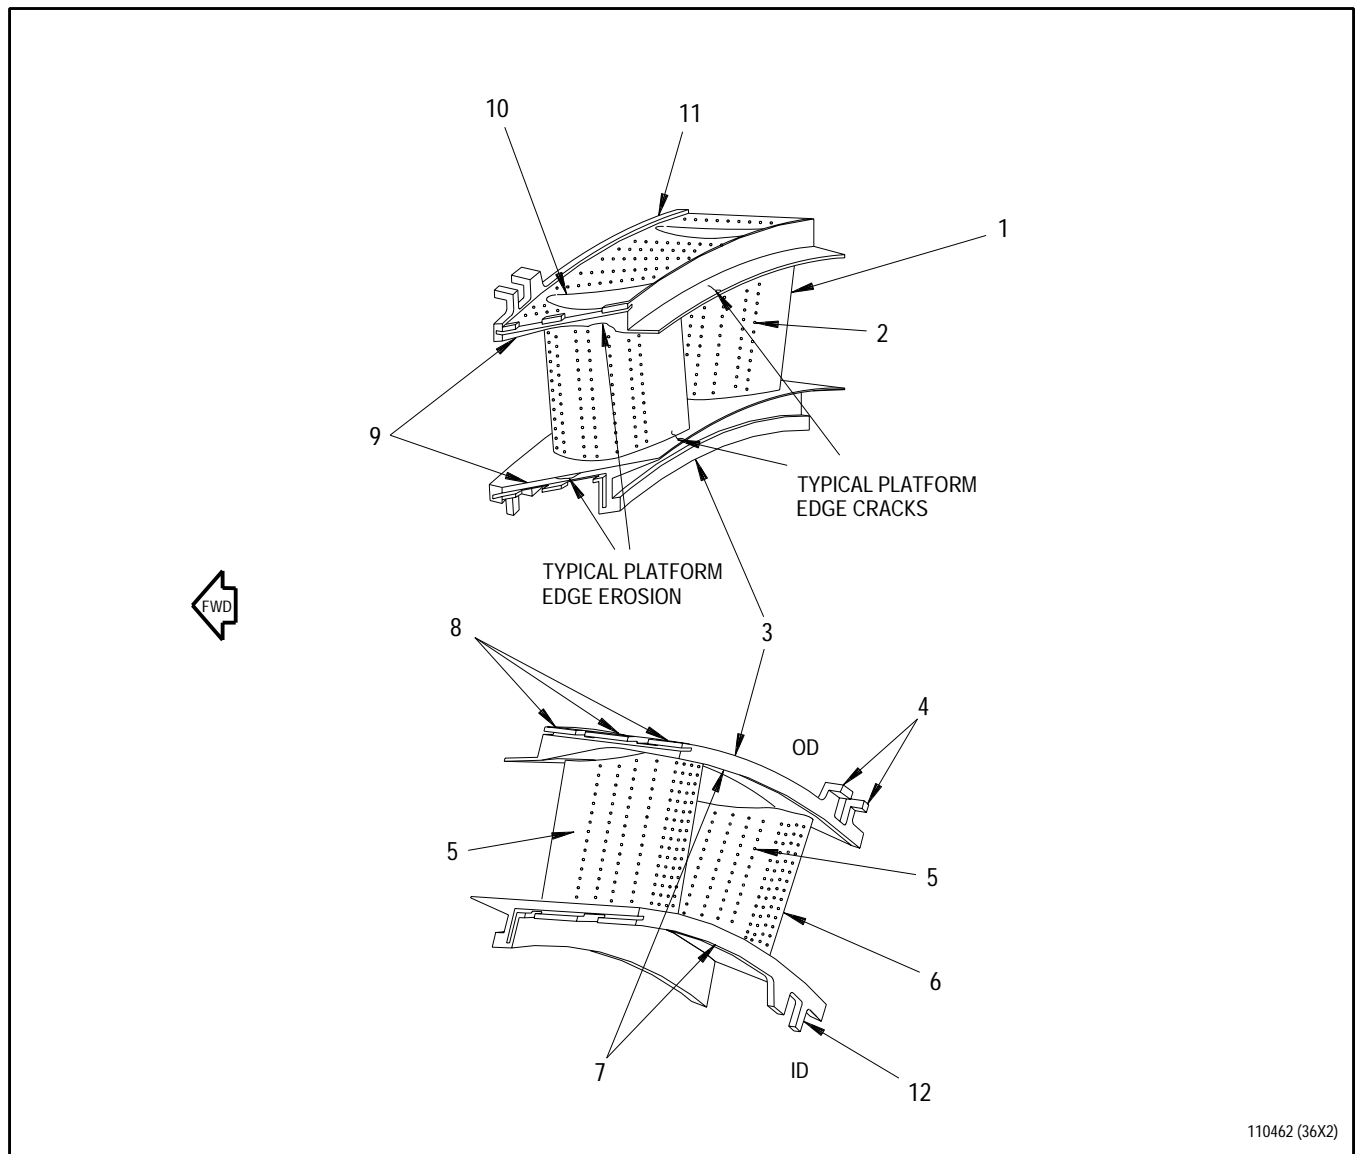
First Stage Turbine Stator Vane Assemblies - Inspection
